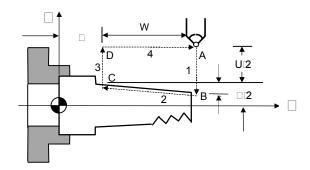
G92 Tapered Thread Cutting Canned Cycle
